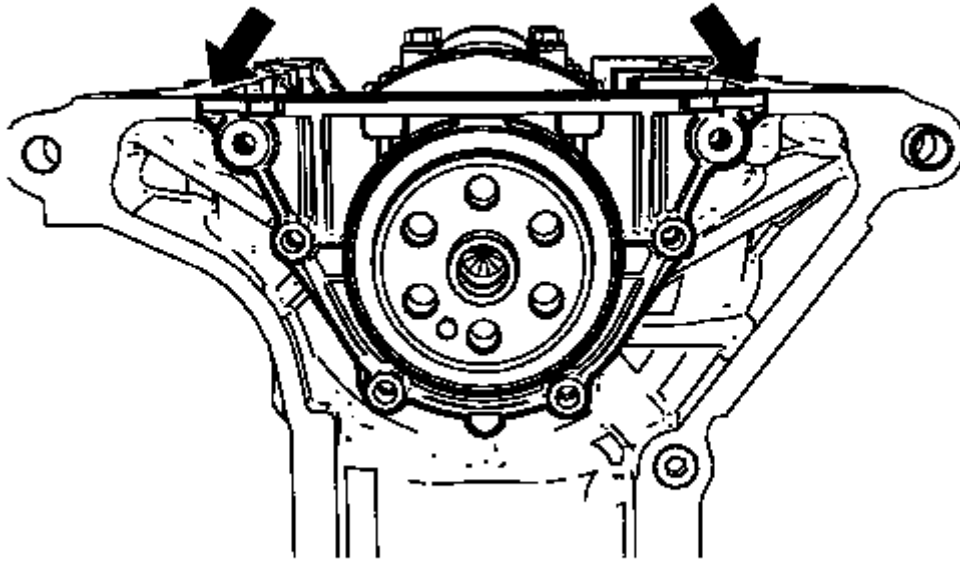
Edge Of Crankshaft Rear Oil Seal Housing
